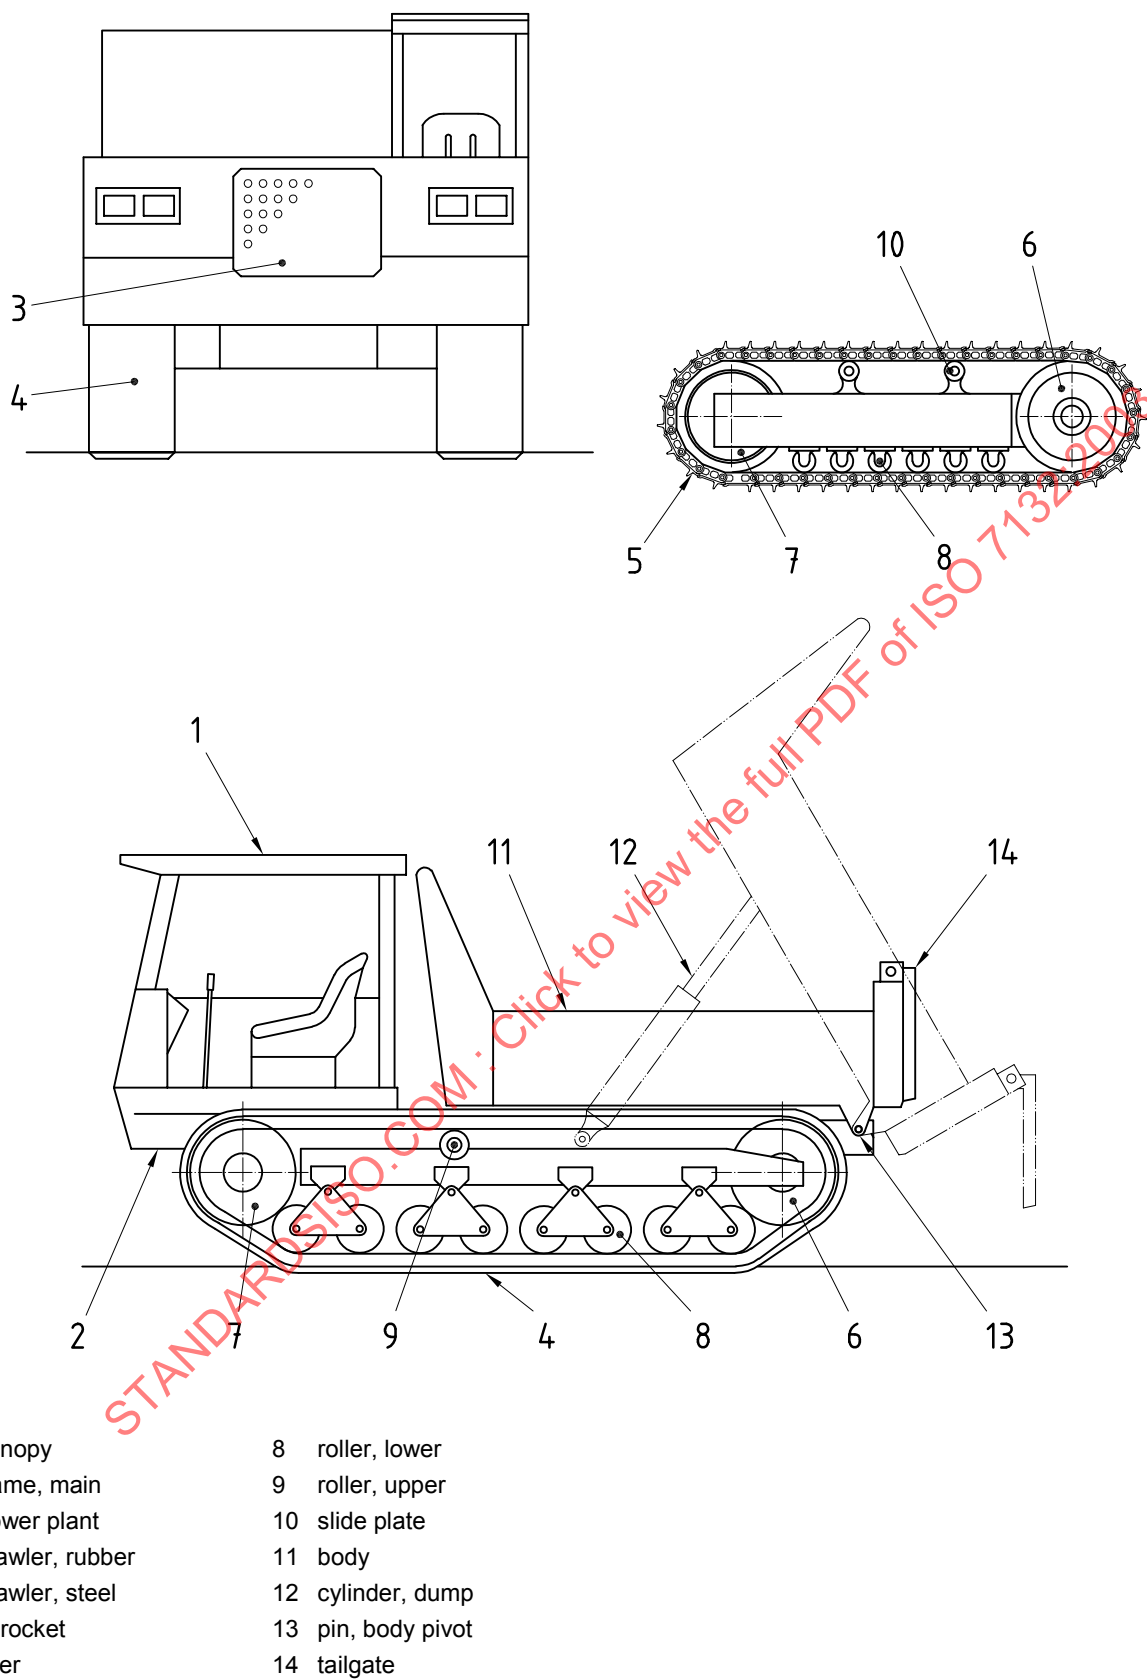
Component nomenclature — Crawler dumpers with canopy
